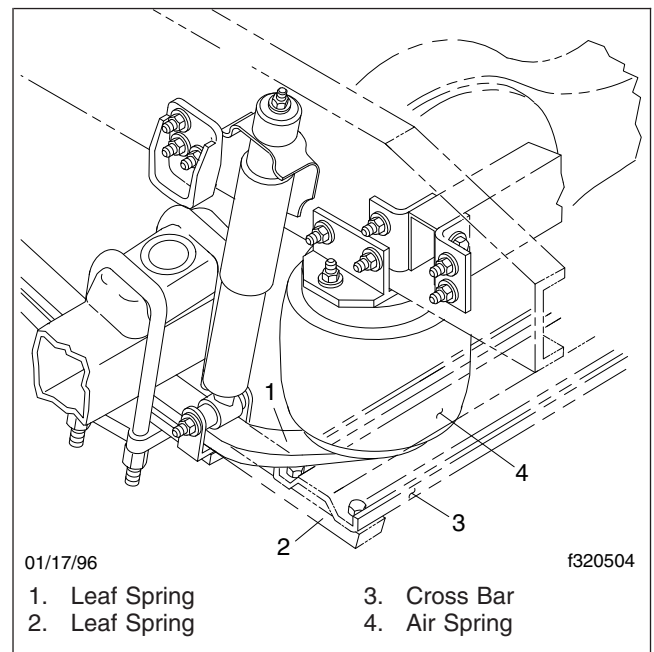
, Leaf Spring and Air Spring Assembly (23,000- and 46,000-pound suspensions)
